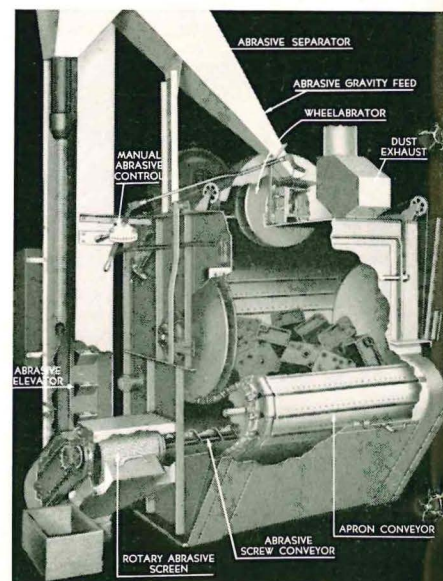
Phantom view of Wheelabrator Tumbblast.
